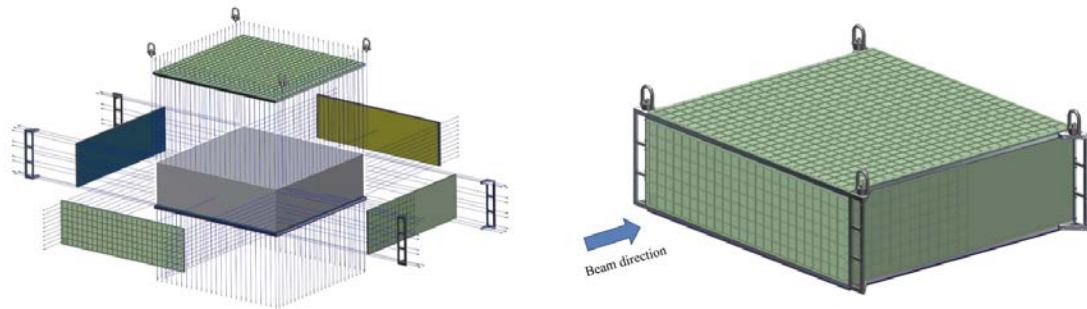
Left: Exploded view of the SuperFGD box. The blue (yellow) surface is a G10-datum (EPDM foam) layer. The green surface is the external G10 mounting layer showing pockets in the surfaces where the photosensor PCBs are installed and flat surfaces where the calibration system will be placed. The central gray volume corresponds to the cube envelope. Right: external view of the closed box. The four lifting fixtures in the top corners will be removed after installing the box in ND280.
